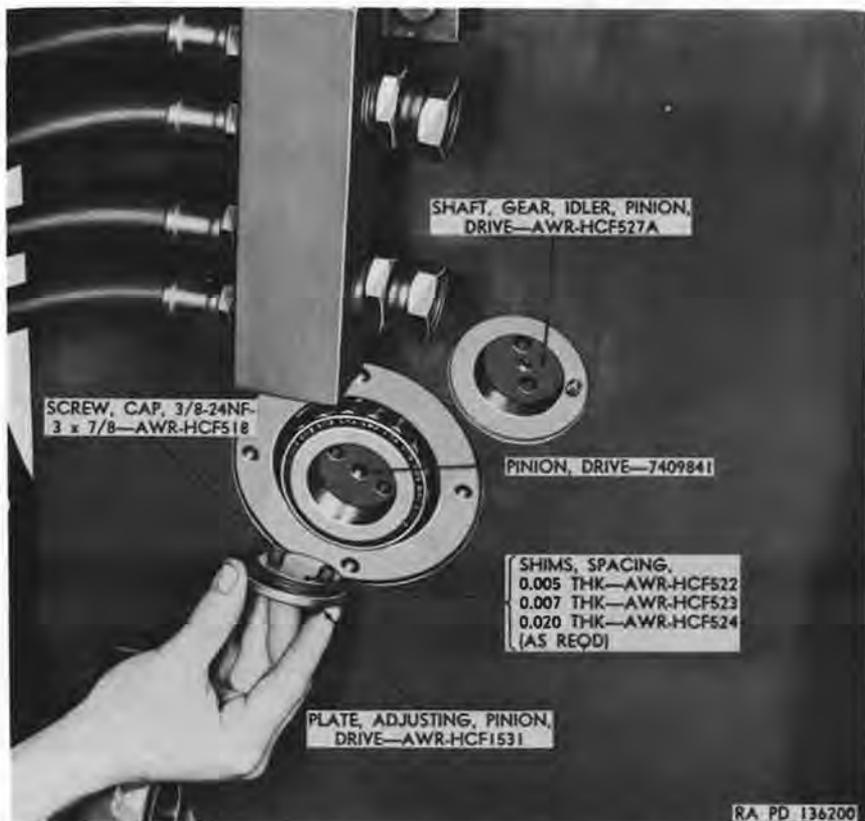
Removing drive pinion adjusting plate and spacing shims.
